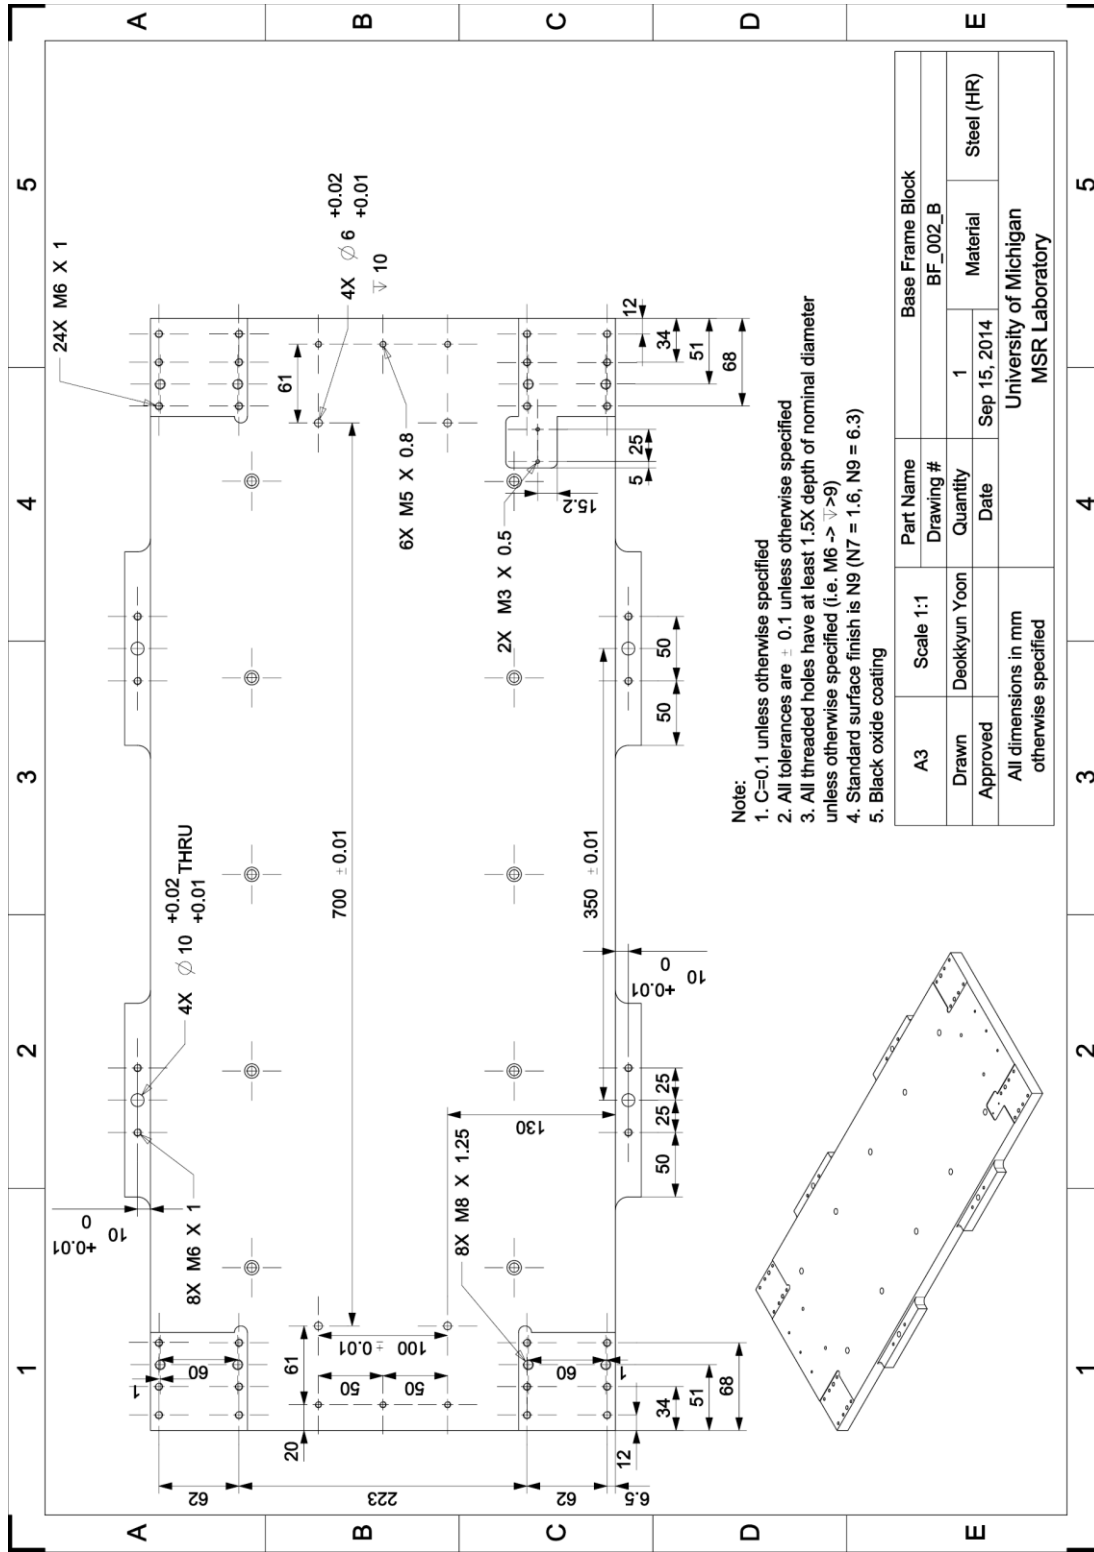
Manufacturing drawing of Base Frame Block (pg. 2 of 2).
